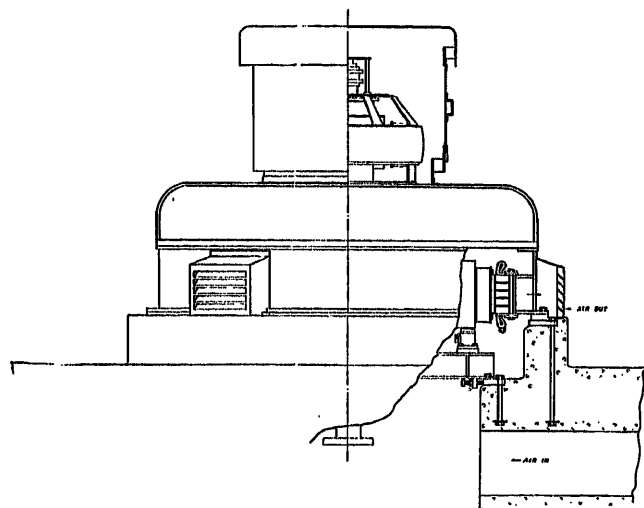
PROPOSED CONSTRUCTION FOR AN OUTDOOR WATER-WHEEL DRIVEN GENERATOR
